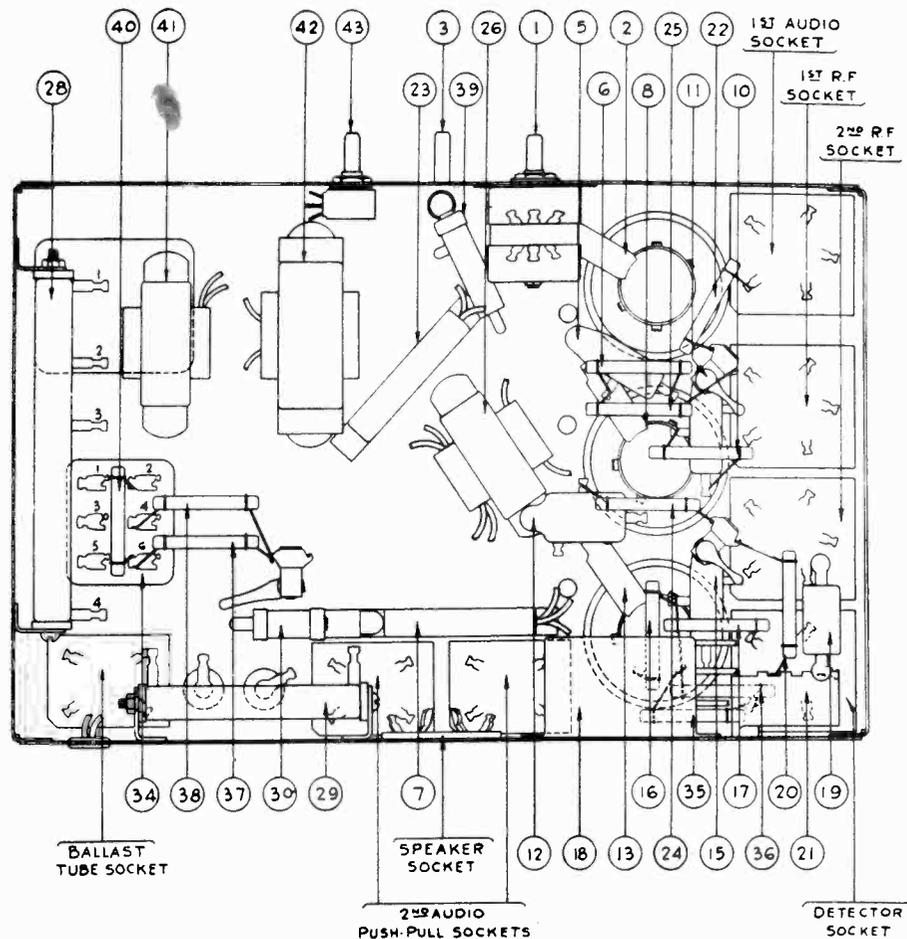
Bottom View of Chassis, Showing Parts, and Position of Compensating Condensers Located,—and Reached,—from Below Chassis
